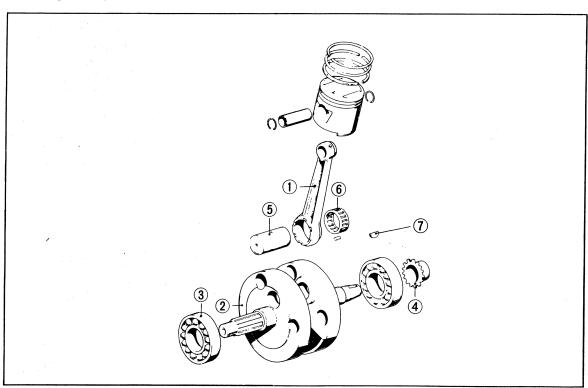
① Connecting rod ② Crank shaft ③ 6305 ball bearing ④ Timming sprocket ⑤ Crank pin ⑥ Retainer ② Key
